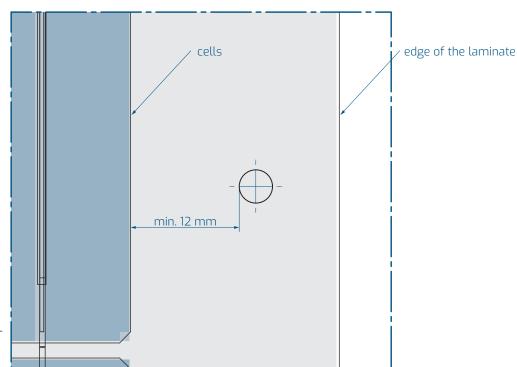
Minimum distance between subsequently drilled mounting holes and electrically conductive components
